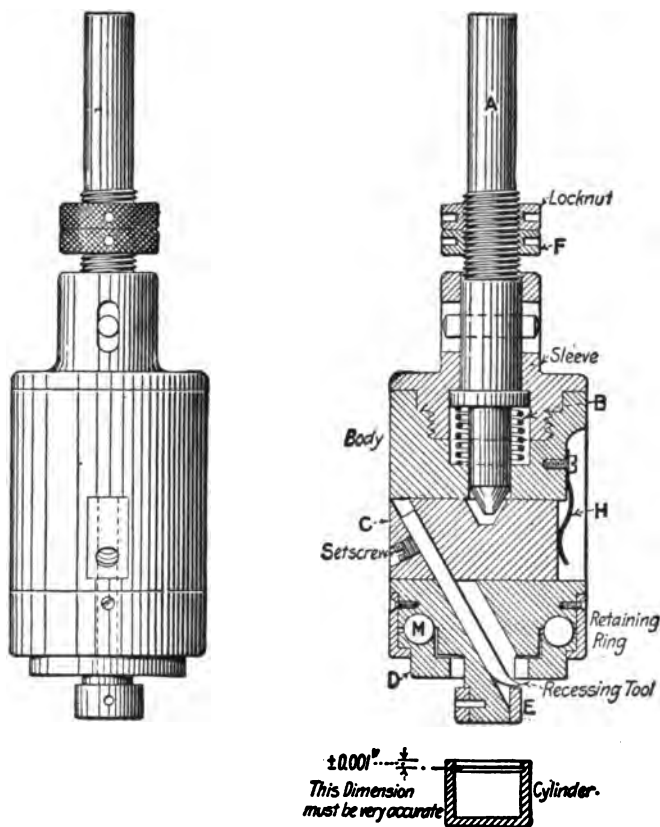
RECESSING TOOL FOR ACCURATE WORK
